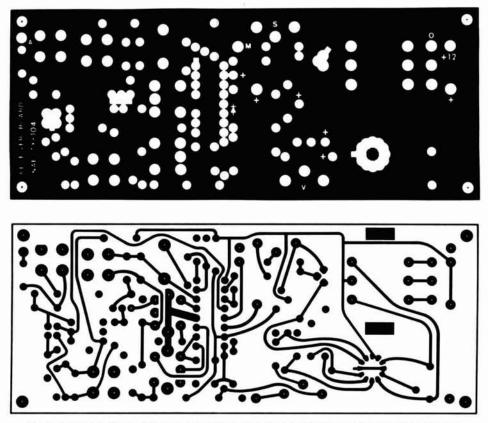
Top and bottom of the receiver PC board. A double-sided layout is used, with some of the components soldered to both sides of the board.
